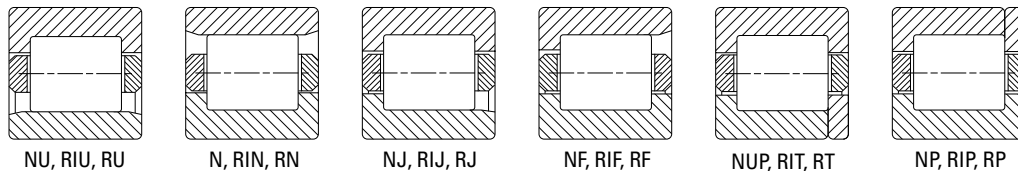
Standard cylindrical roller bearing styles metric/inch.
